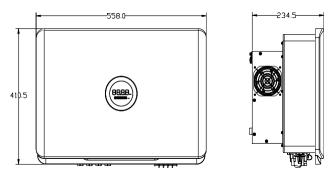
Dimensions of R6-15K/17K/20K/22K/25K-T2-32;
